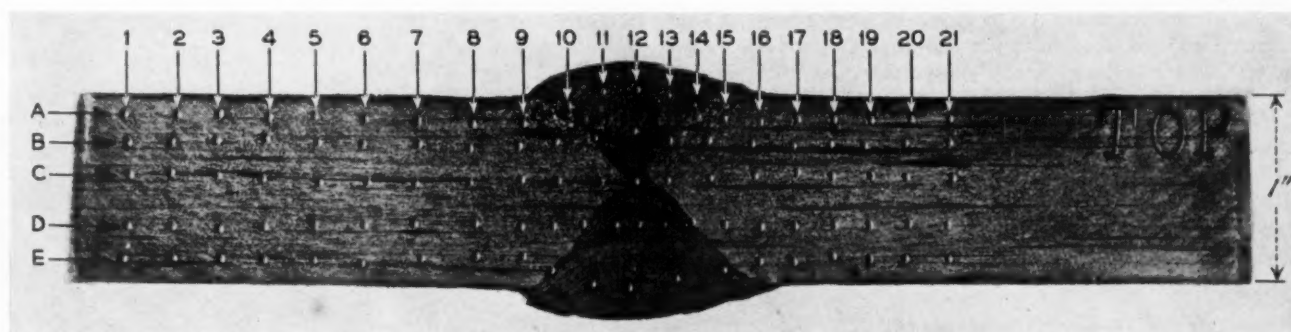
OXYACETYLENE-WELDED SPECIMEN SHOWING ROCKWELL HARDNESS OF PLATE, FUSION ZONE, AND WELD
